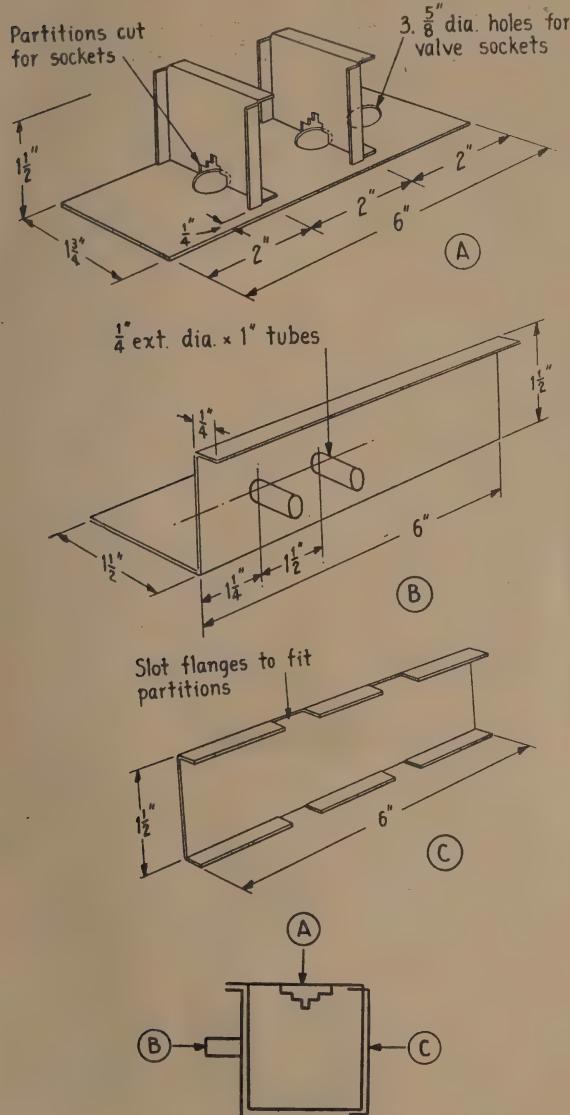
Showing the three main parts (A), (B) and (C) for a valve unit suitable for miniature valves. The fourth drawing (at the bottom) shows how the three parts are fitted together.
